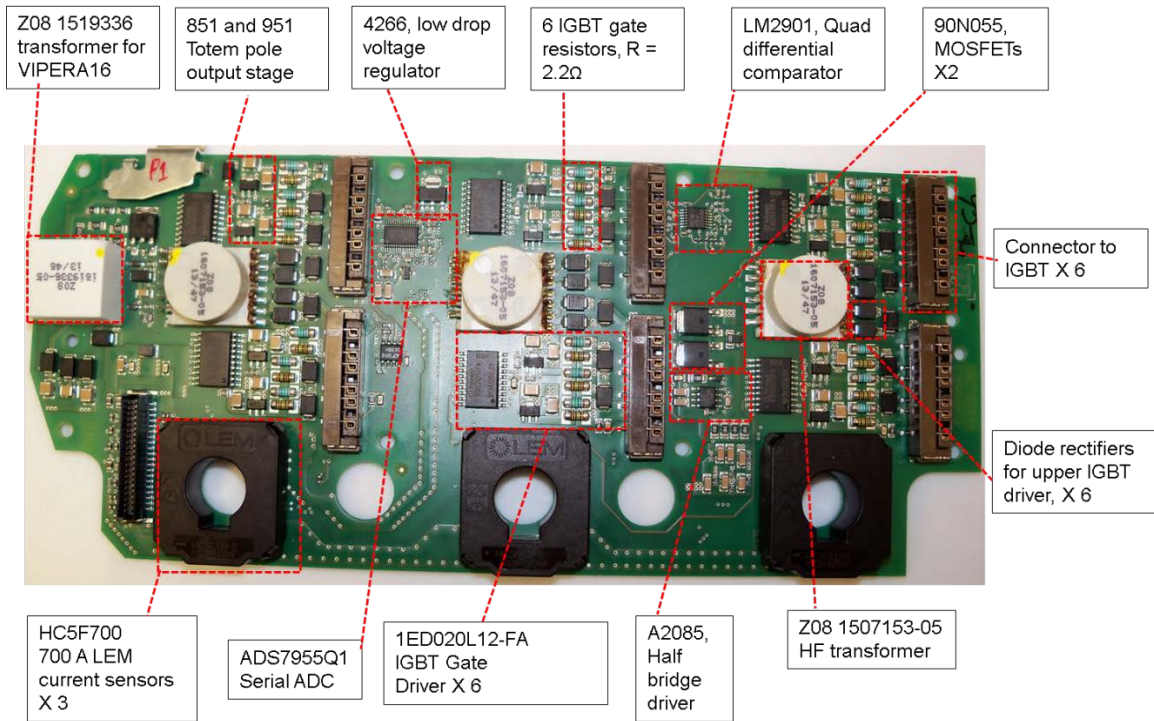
Key components on driver board in 2016 BMW i3 inverter power module.
